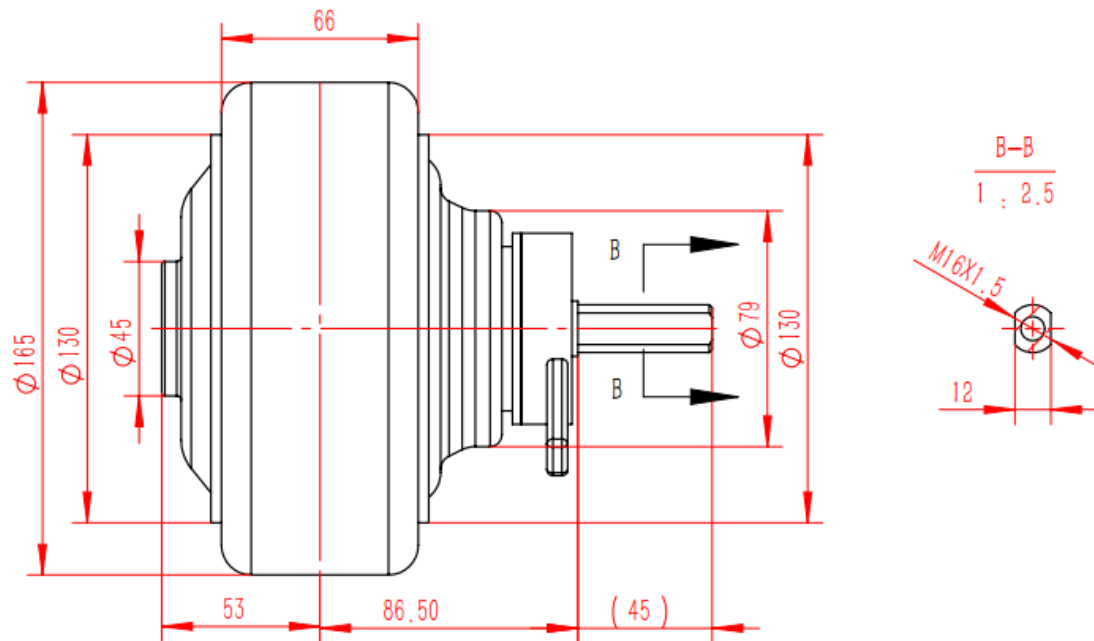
6 inch 13Nm/15Nm coated polyurethane tire hub motor mounting size
